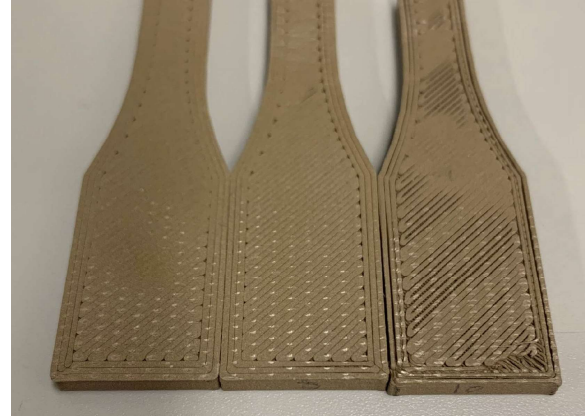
Manufactured specimen of tensile, each print speed is 30(left), 60(center) and 90(right) mm/s
